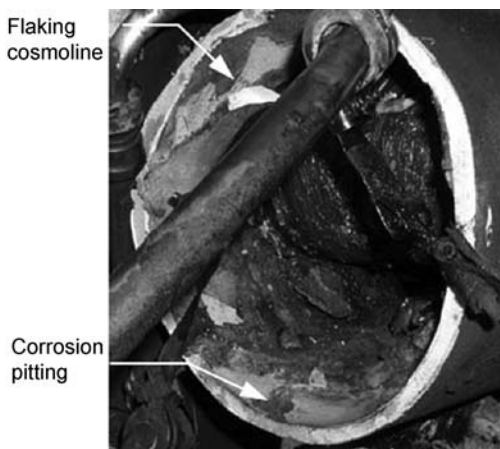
Fracture surface of Boeing 757 main landing gear truck beam on Icelandic Air aircraft TF-FJ
